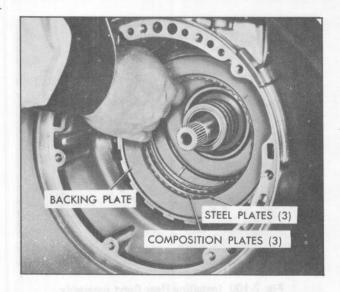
Installing Intermediate Clutch Plates the case splines, torque the case-to-center support bolt to 23 ft. lbs. using a 3/8" thin wall deep socket.
